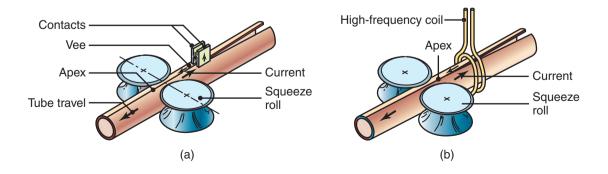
Two methods of high-frequency continuous butt welding of tubes.
